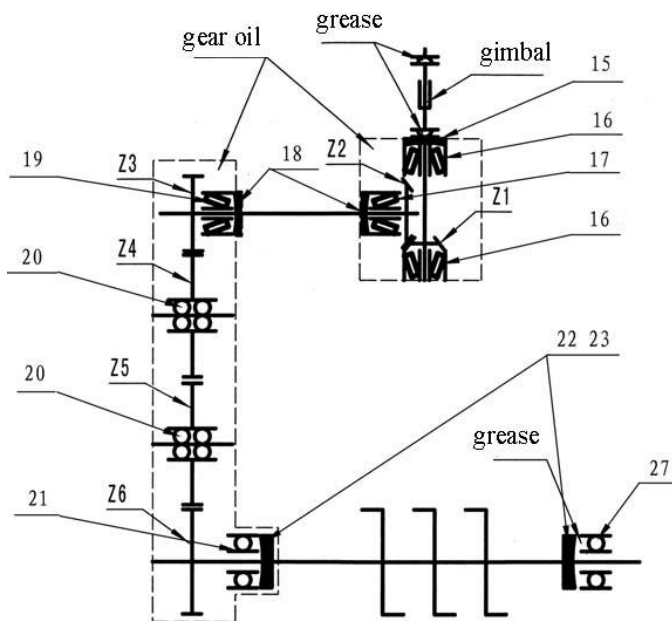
Installation Positions of Key Standard Parts of Lubricating Positions
